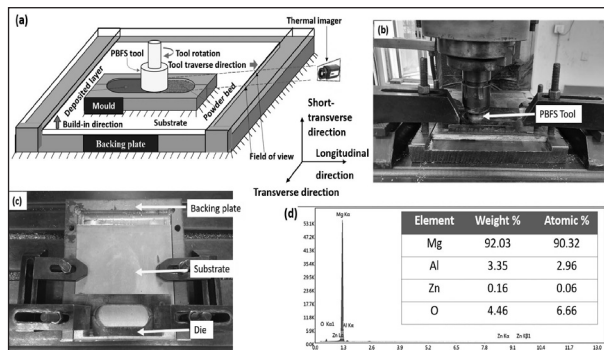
Showing (a) Schematic of PBFS process with thermal measurement; (b) actual photographs of PBFS setup; (c) plate and mold arrangement; (d) compositional analysis of the AZ31B powder.
